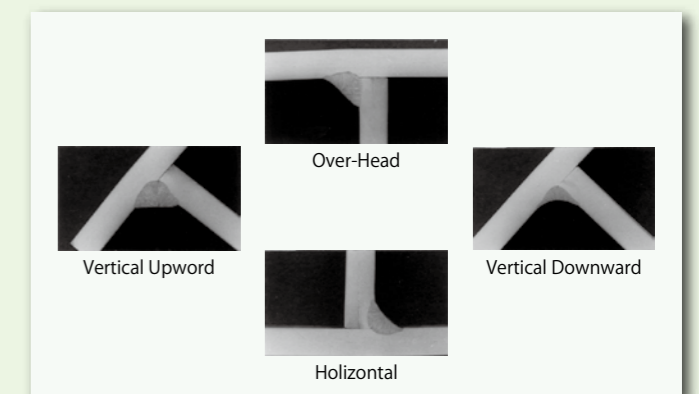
Cross-section of macrostructure of DW-308LP fillet weld (304L base plate of 3 mm thick)
